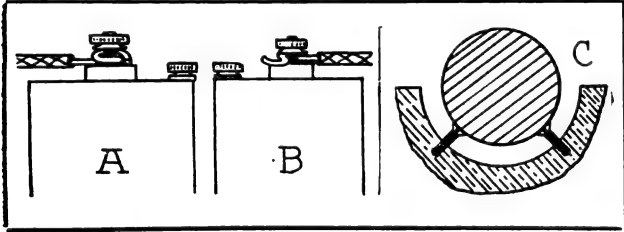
A, Correct Turn of Cable on Binding Post; B, Incorrect Turn of Terminal Wire; C, Alignment of Shaft When Babbitting Bearings.
